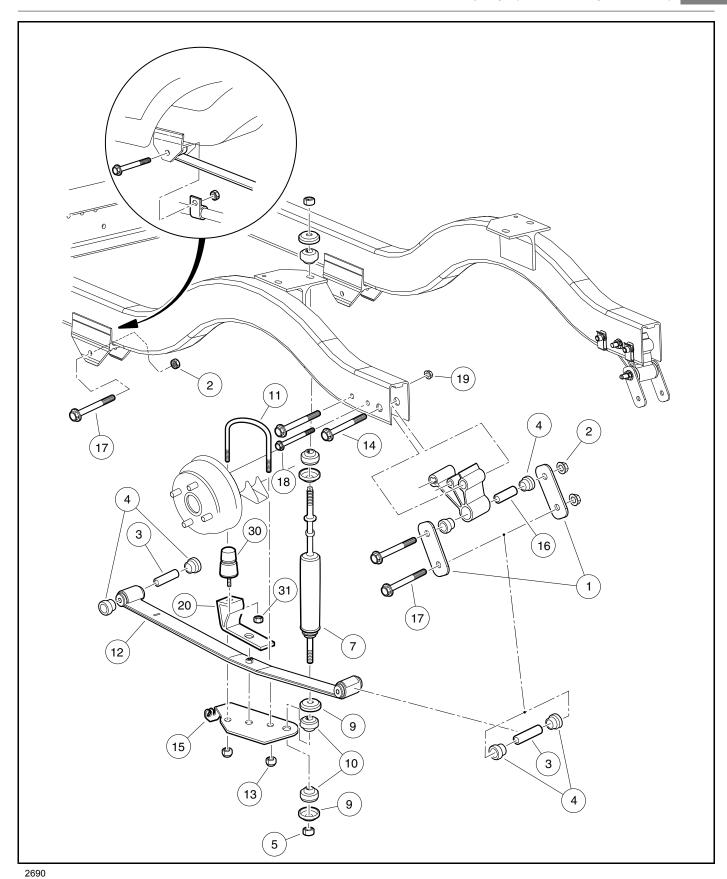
Rear Suspension Assembly and Mounting (Four-Passenger Vehicles)
